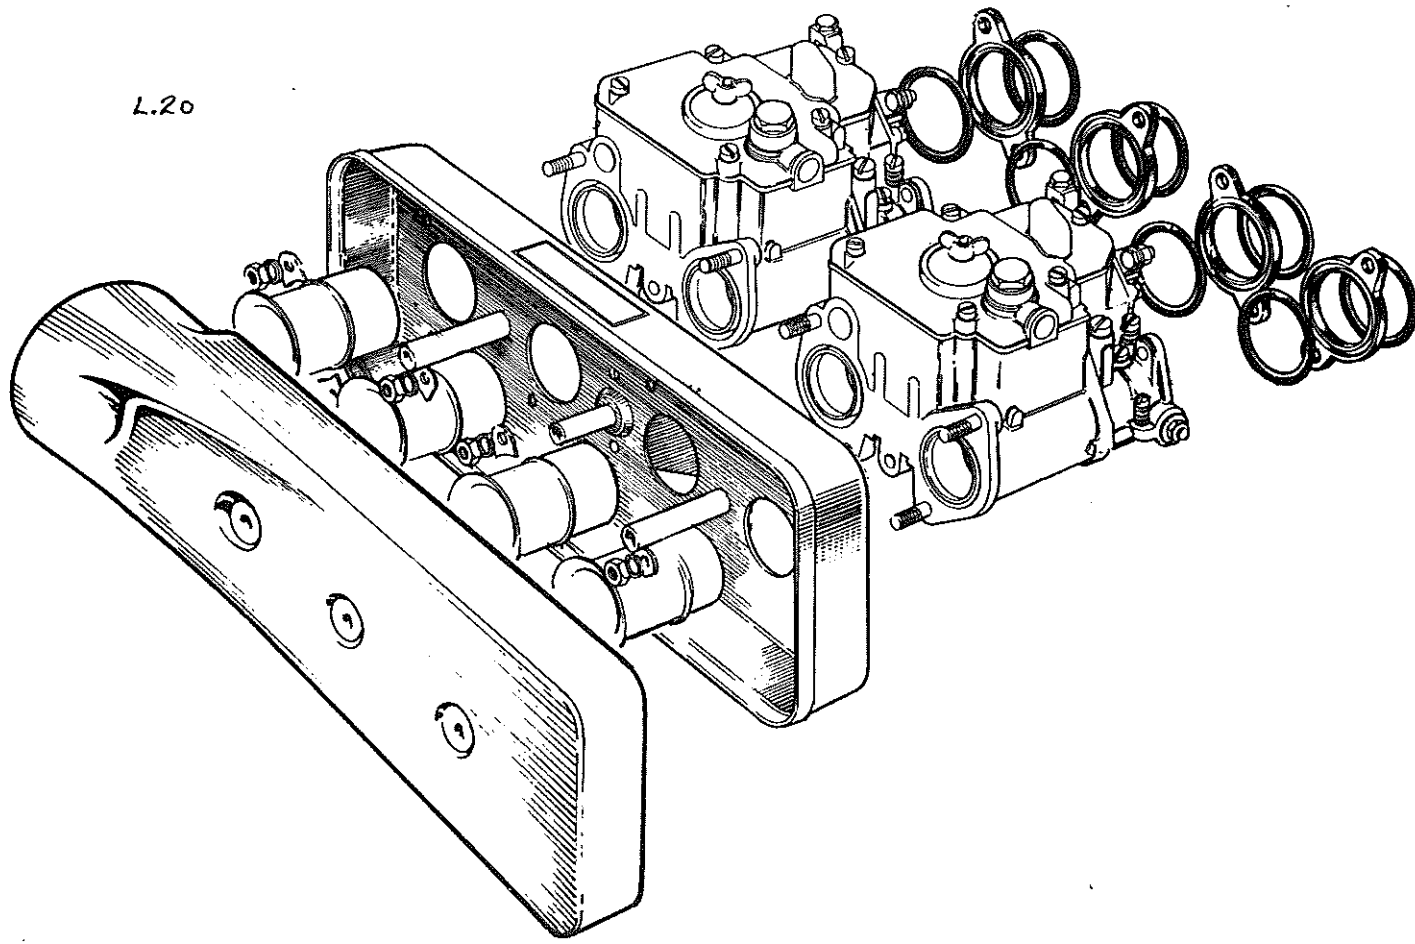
AIR BOX & CARBURETTER ASSEMBLY
